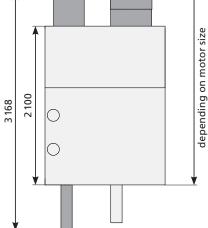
Dimensions (mm) of a CGL with positioning devices, right-hand design
